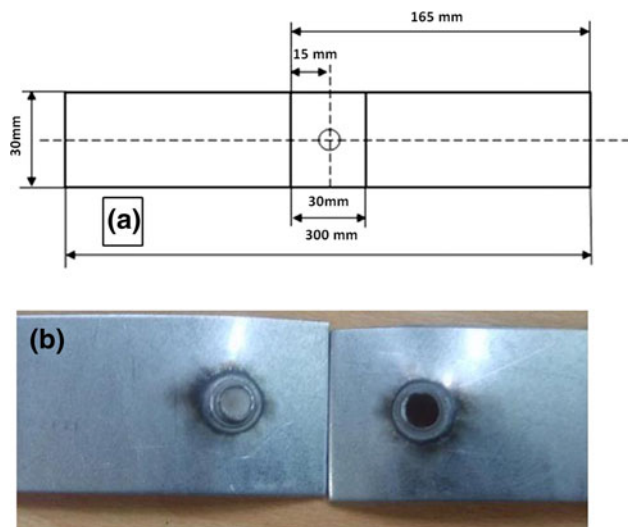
(a) Sizes of tensile-shear test sample and (b) specimens after tensile-shear test
